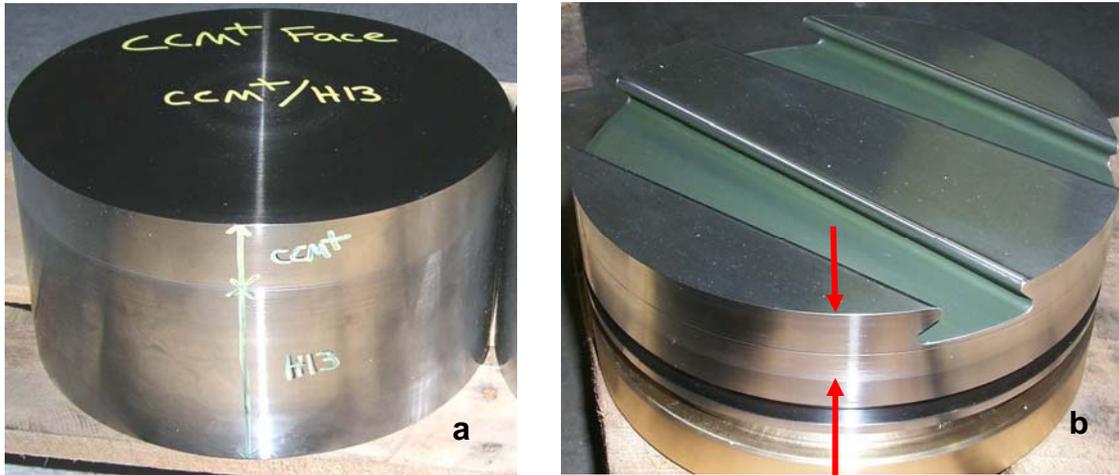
CCM Plus/H13 bi-metallic piston head blank (a) and finish machined tool (b).
